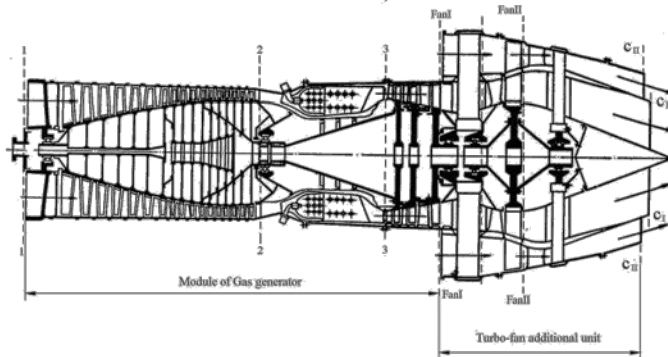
The scheme of gas turbine engine with turbo-fan module
